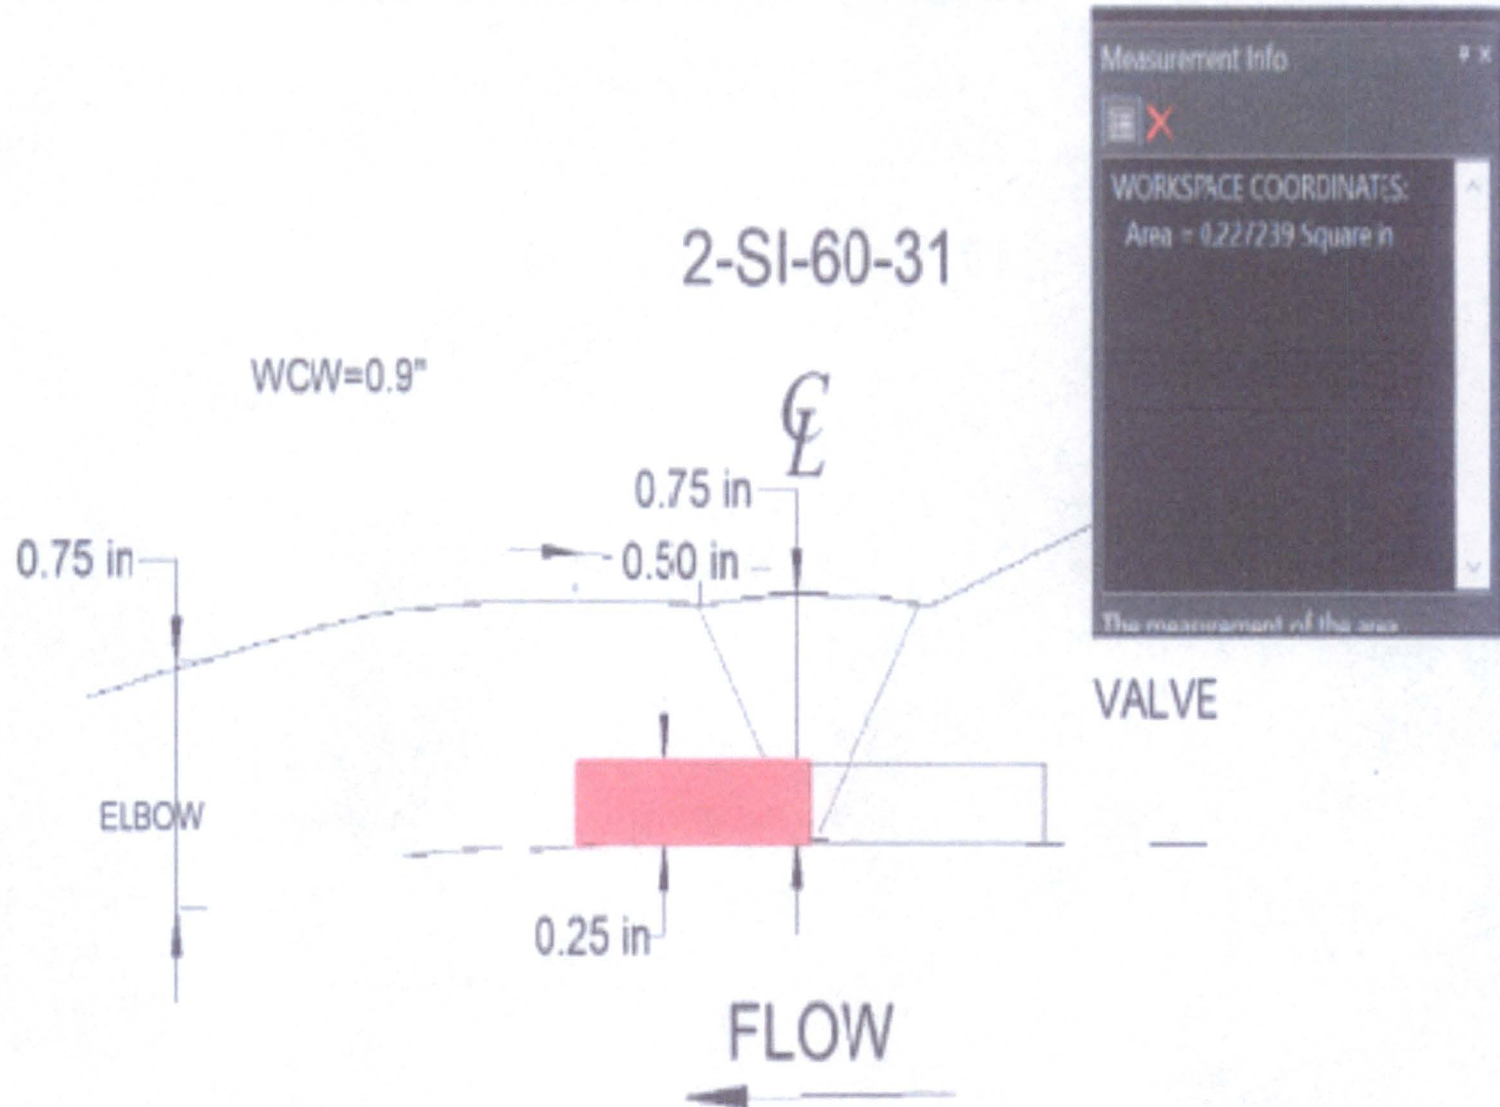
Weld 2-SI-60-31 (Extracted from Reference DRAWING 2A-52)
